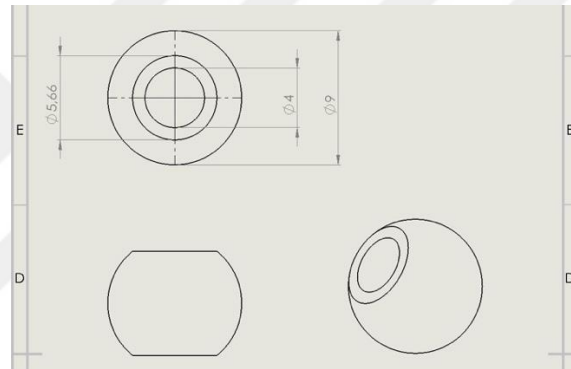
The technical drawing of the bearing's internal piece.
